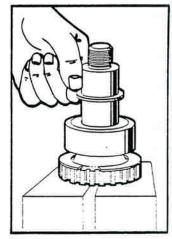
Bearing Installation. Figure 7-21. Spacer Placement
